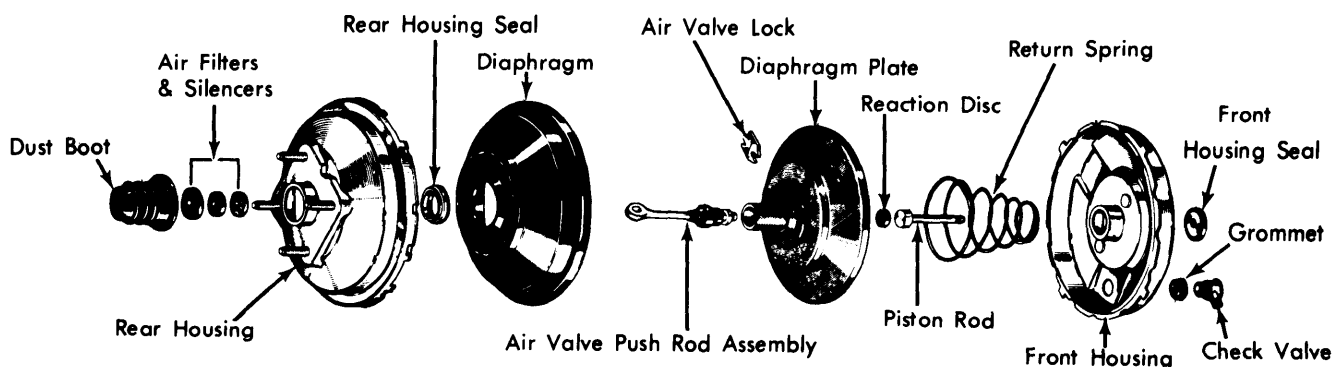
Exploded View of Bendix Single Diaphragm Assembly
